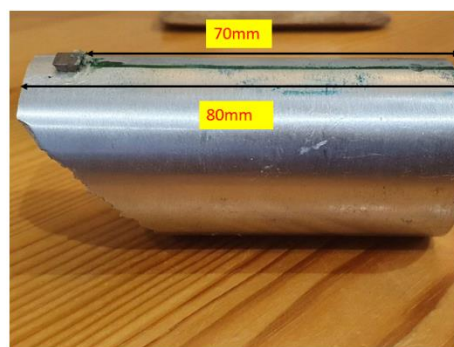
Diagram of showing dimensions how clip gauge was attached to the specimen using a block .
